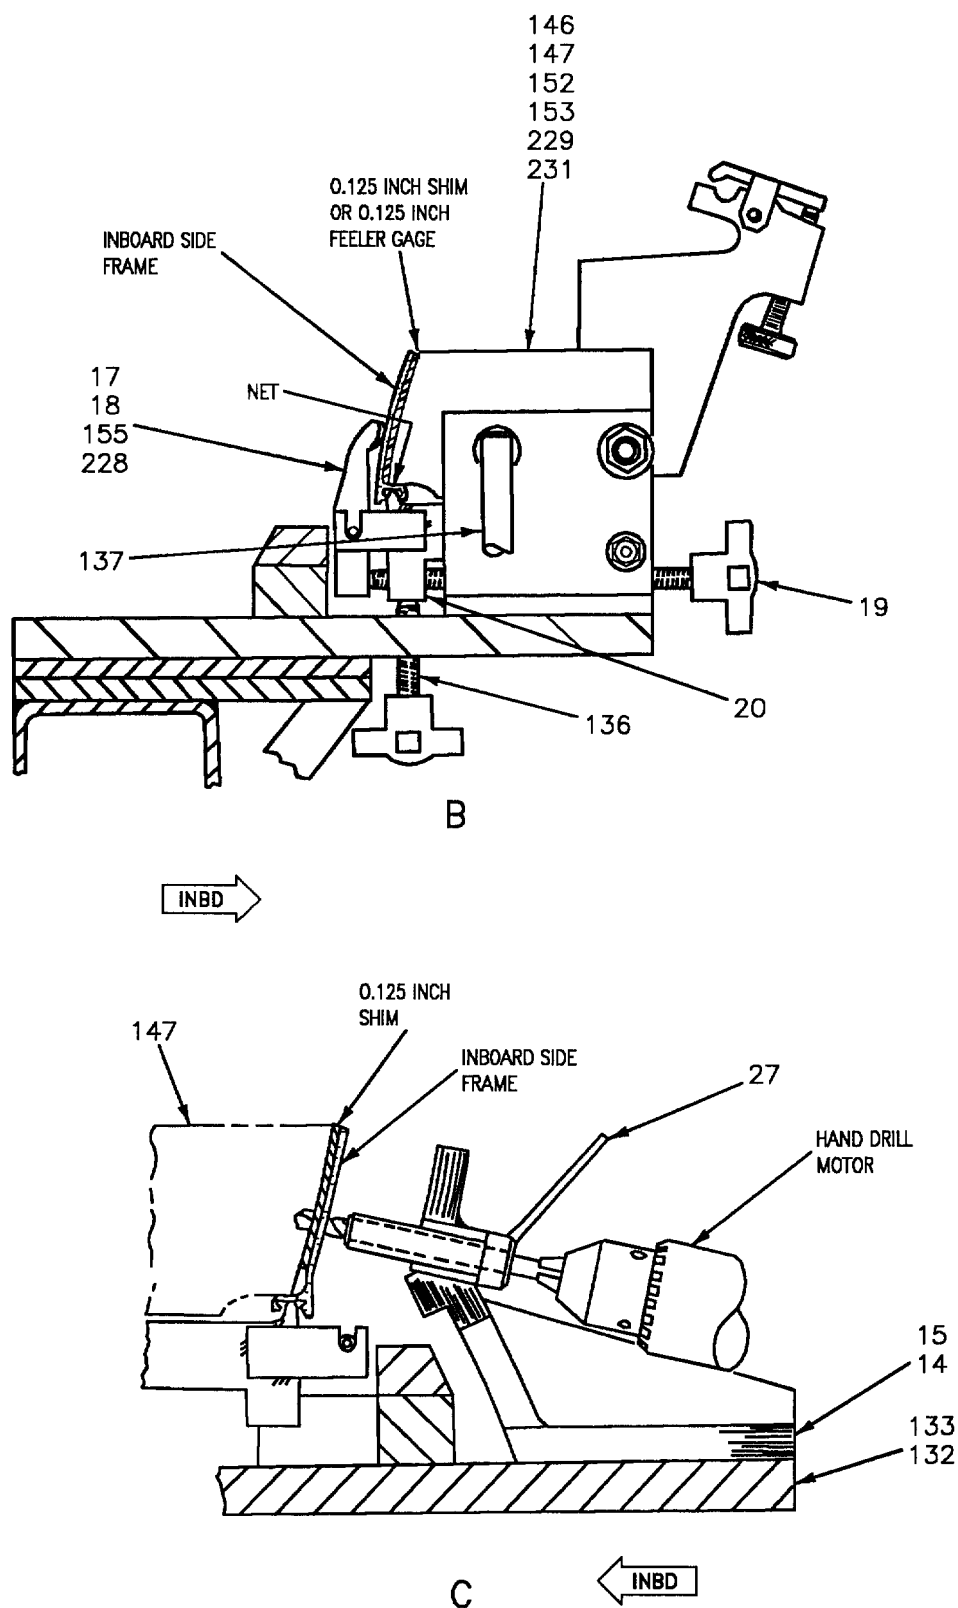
Inspection or Replacement - Inboard Side Frame (Sheet 3)
